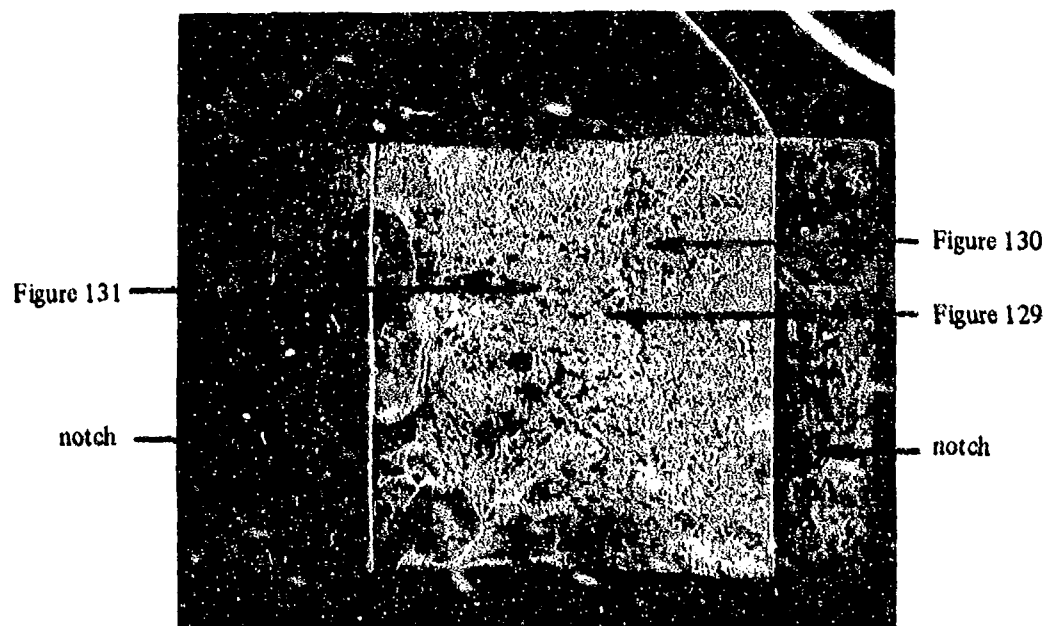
Fatigue fracture surface of hydrogen-embrittled AX-110 weld specimen, 10x.
